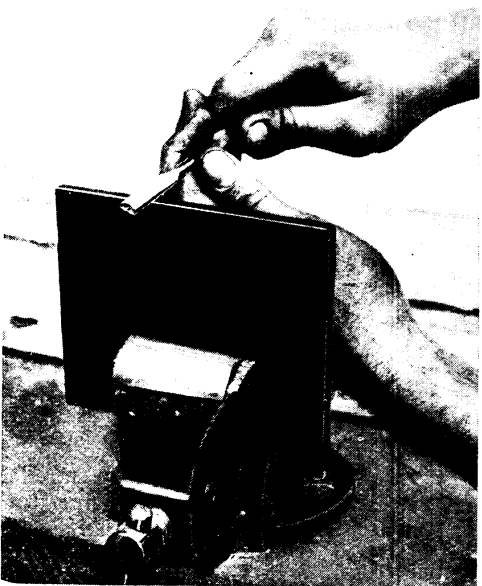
An engineer's steel scraper may be used for making the edges smooth and true instead of a file. Note how the scraper is held
